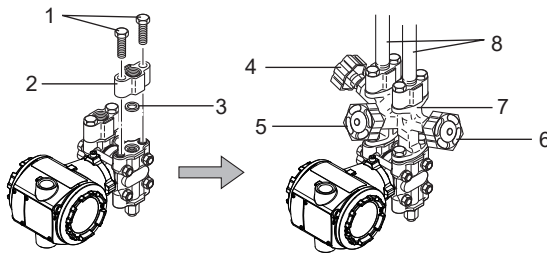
3-Valve Manifold (Pipe-Mounting Type)
